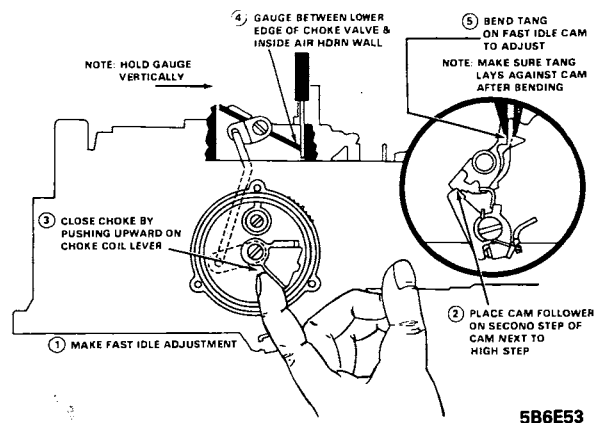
E-53 - Fast Idle Cam (Choke Rod) Adjustment
